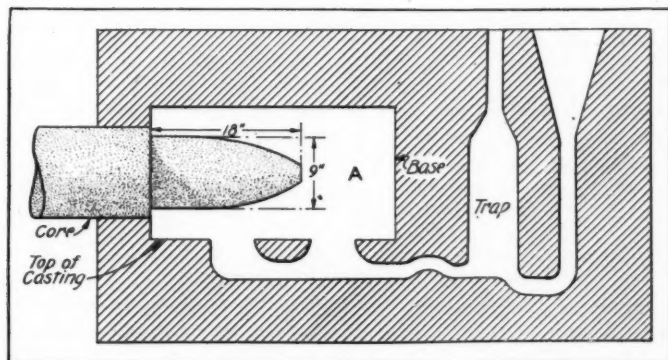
TWO-PART CAST-IRON MOLD OF SHELL BUSHING WITH 15 INCHES OF METAL SURROUNDING GATES, RUNNERS AND CASTING
